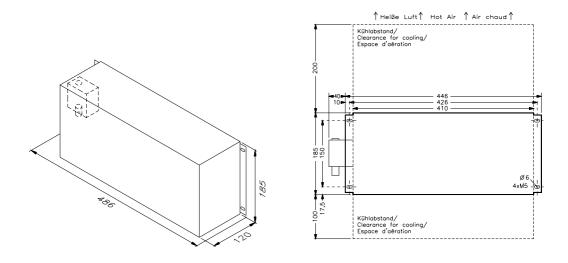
Outline drawing and mounting 1.2RE100/56
